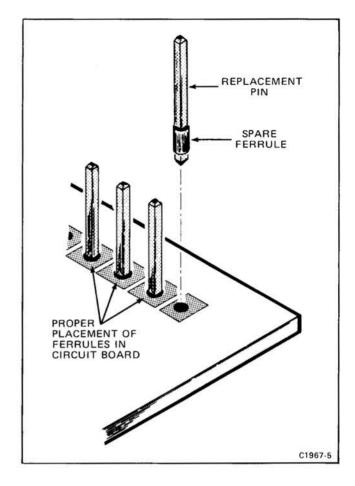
Exploded view of circuit-board pin and ferrule.
